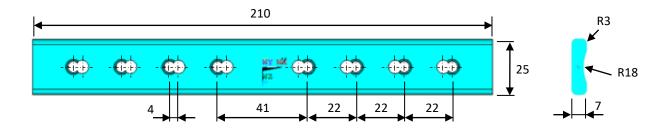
Dimensions of LCP plate with 8 screw holes configuration (in mm)
